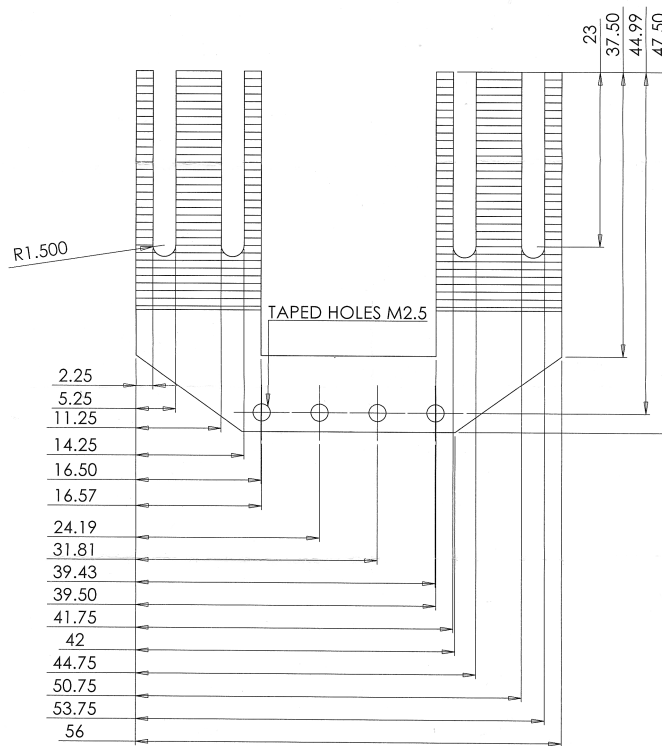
A SolidWorks drawing of the bottom chip rail bracket.
